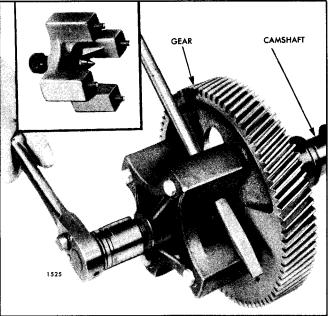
Removing Camshaft Gear with Tool J 1902-01
